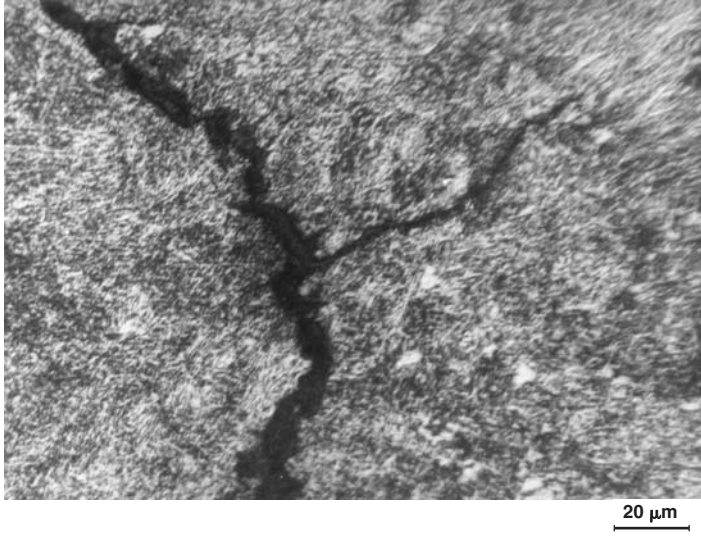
Branching cracks close to the fracture surface seen in bolt No. 2
